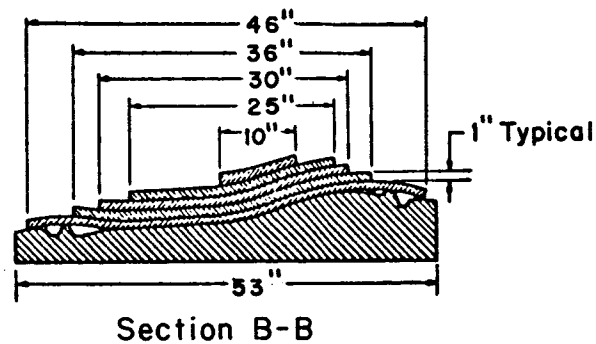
POSITIONING OF RUBBER BLANKETS (REF. 43)
